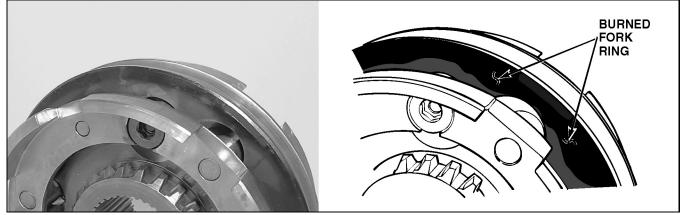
Synchronizer Hi-Lo Sliding Clutch
